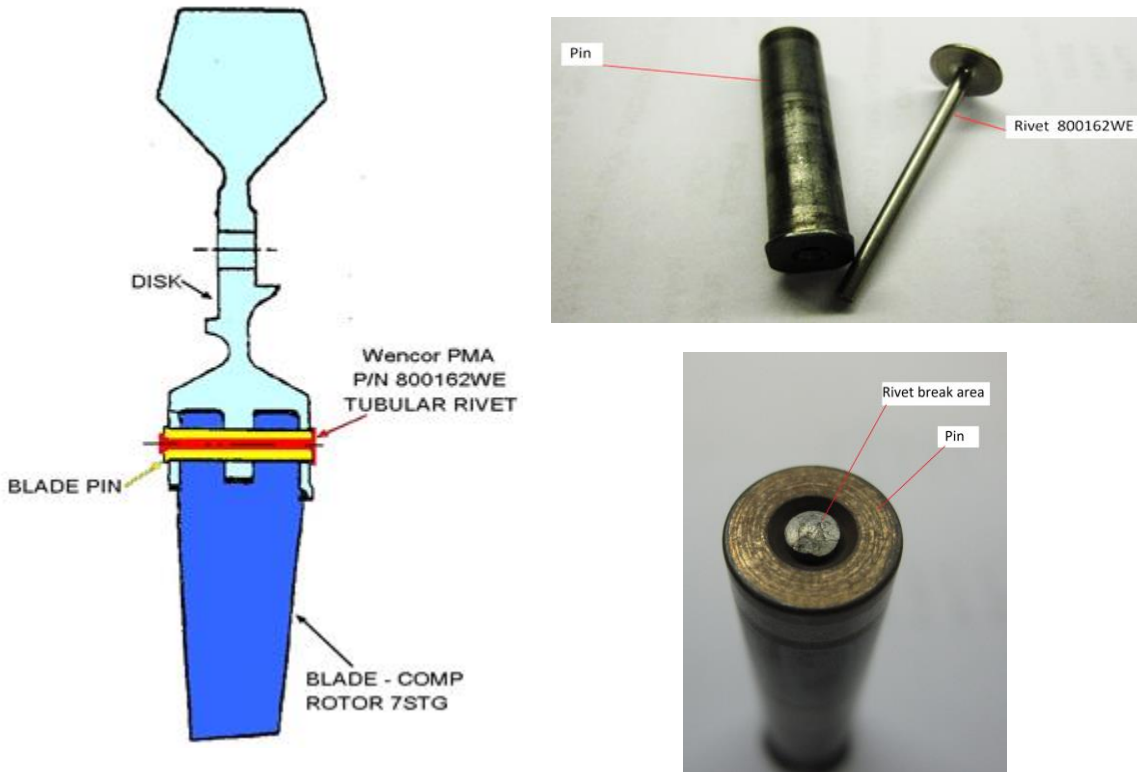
Left: 7th-Stage HPC blade-disk assembly showing rivet P/N 800162WE (red) within the blade retaining pin (yellow). There are 60 rivet/pin assemblies per disk. Top right: blade retaining pin and Rivet P/N 800162WE. Bottom right: one of the rivets with missing head as found during engine disassembly.
